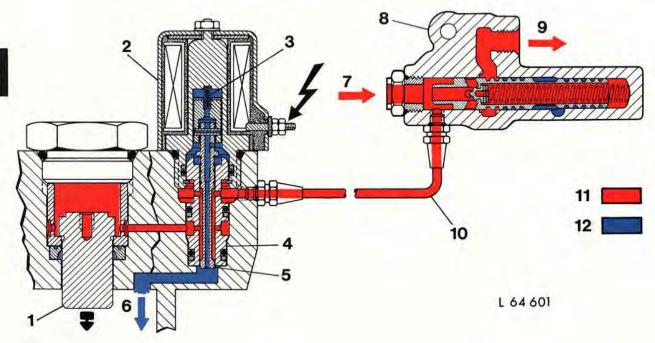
Oil Flow to the Clutch Piston with MFWD Engaged
